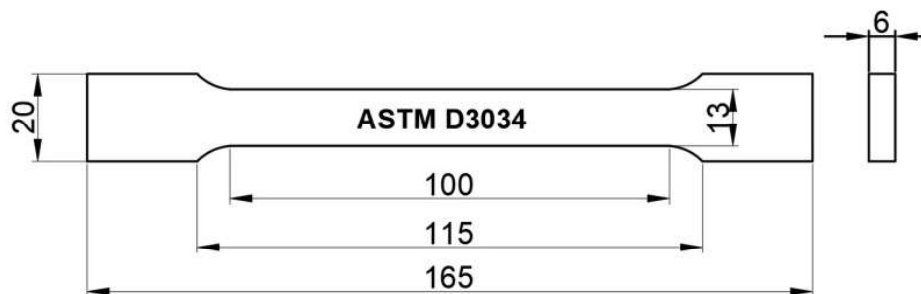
Shape and Dimension of the tensile sample as per ASTM D3034 (all dimensions are in mm).
